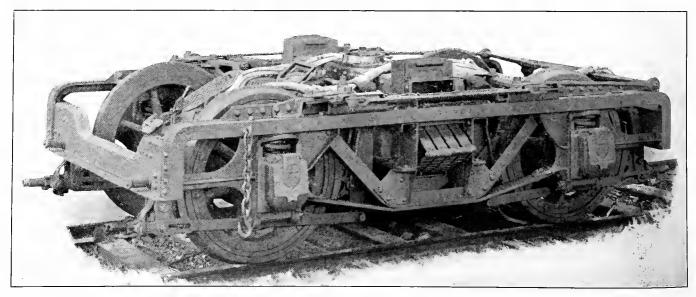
Four-Wheel Motor Truck with Clasp Brake Arrangement for New York, Westchester & Boston Car Shown in Fig. 189.
